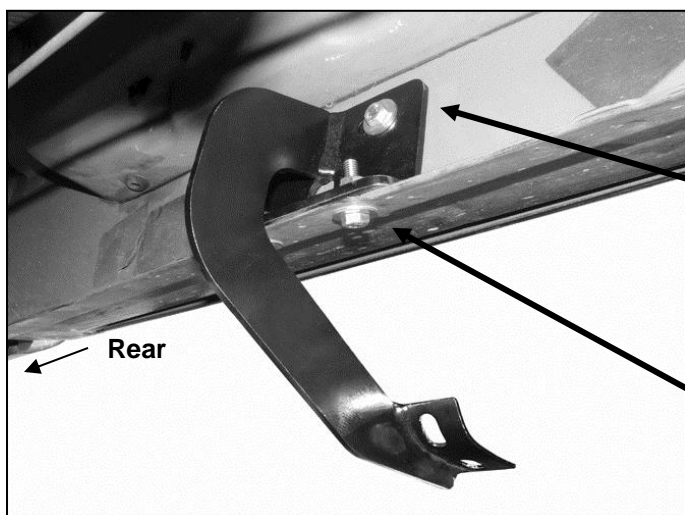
8mm Clip Nuts (hole in body panel shown for example only-location and shape may differ slightly)
